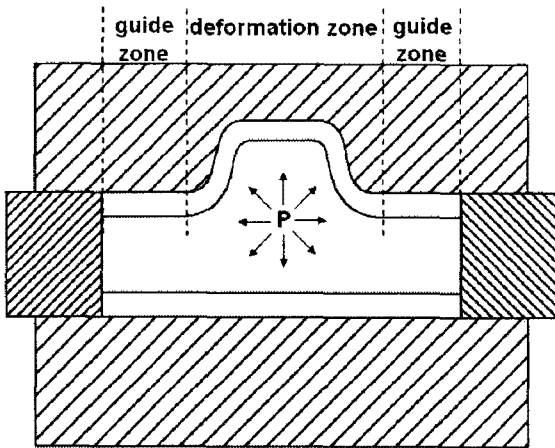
Schematic drawing of friction zones in tube hydroforming
